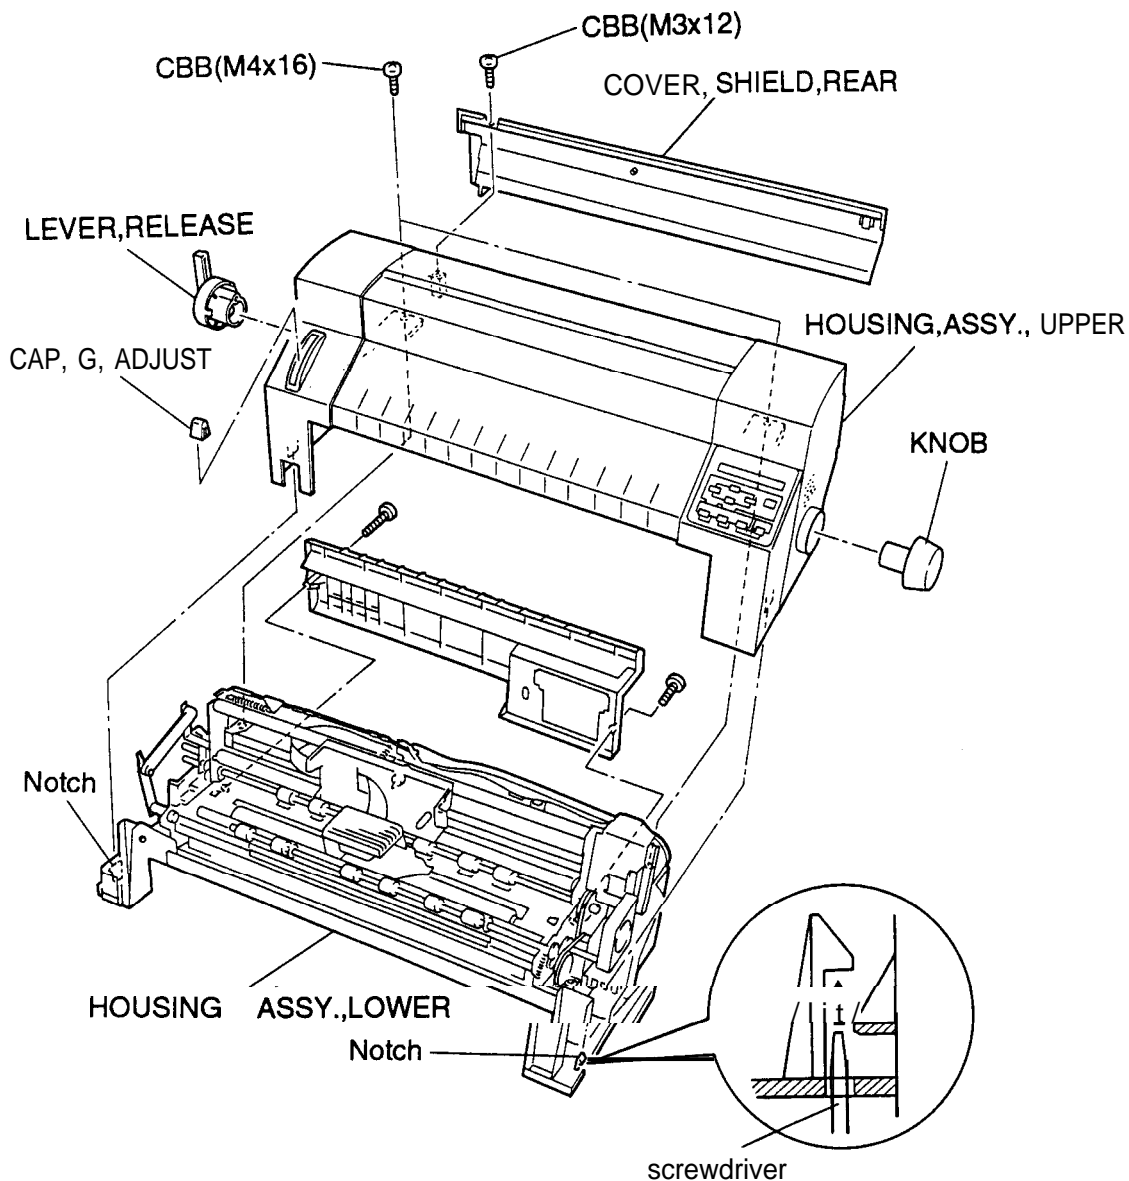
Removing the HOUSING,ASSY.,U PPER
